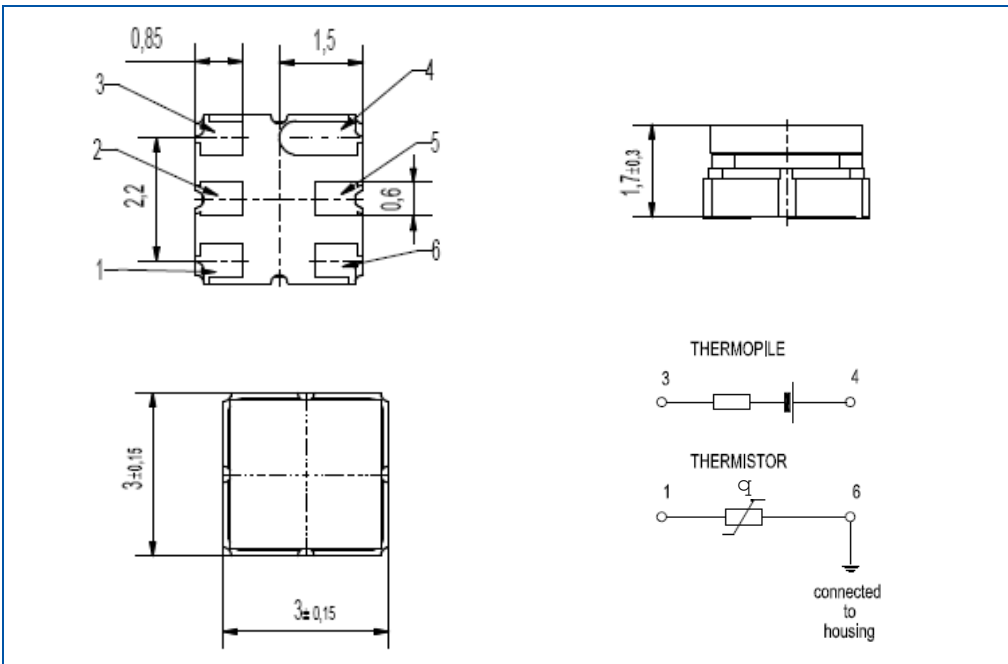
Mechanical Drawing of the TPS 23S (Drawing No.: 2/71788)
